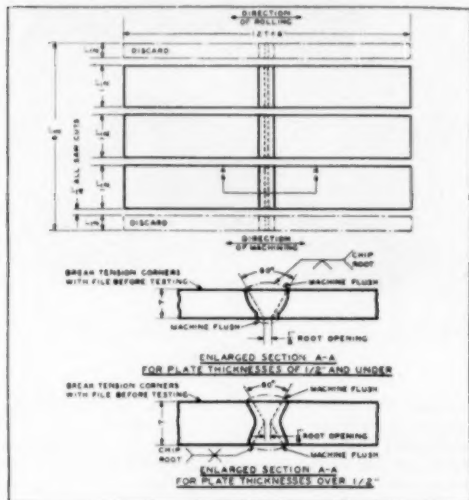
DETAILS OF STANDARD TRANSVERSELY BUTT-WELDED BEND SPECIMENS
